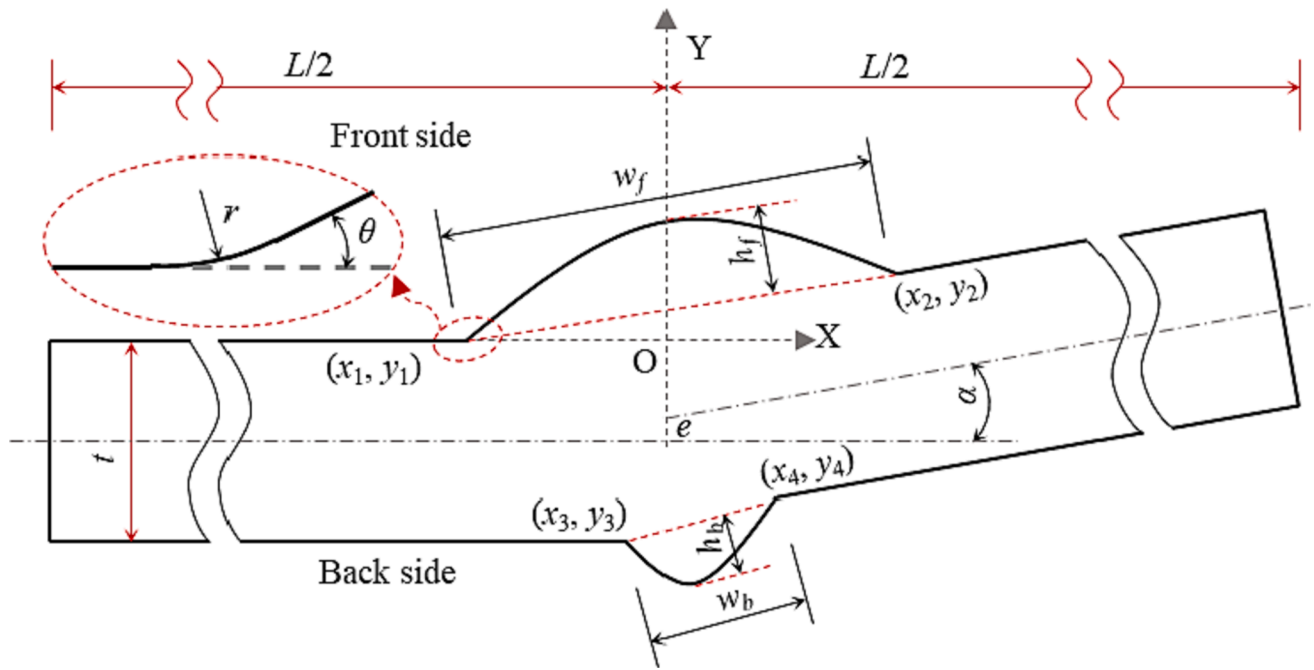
Definition of weld geometrical parameters for a butt-welded joint.
